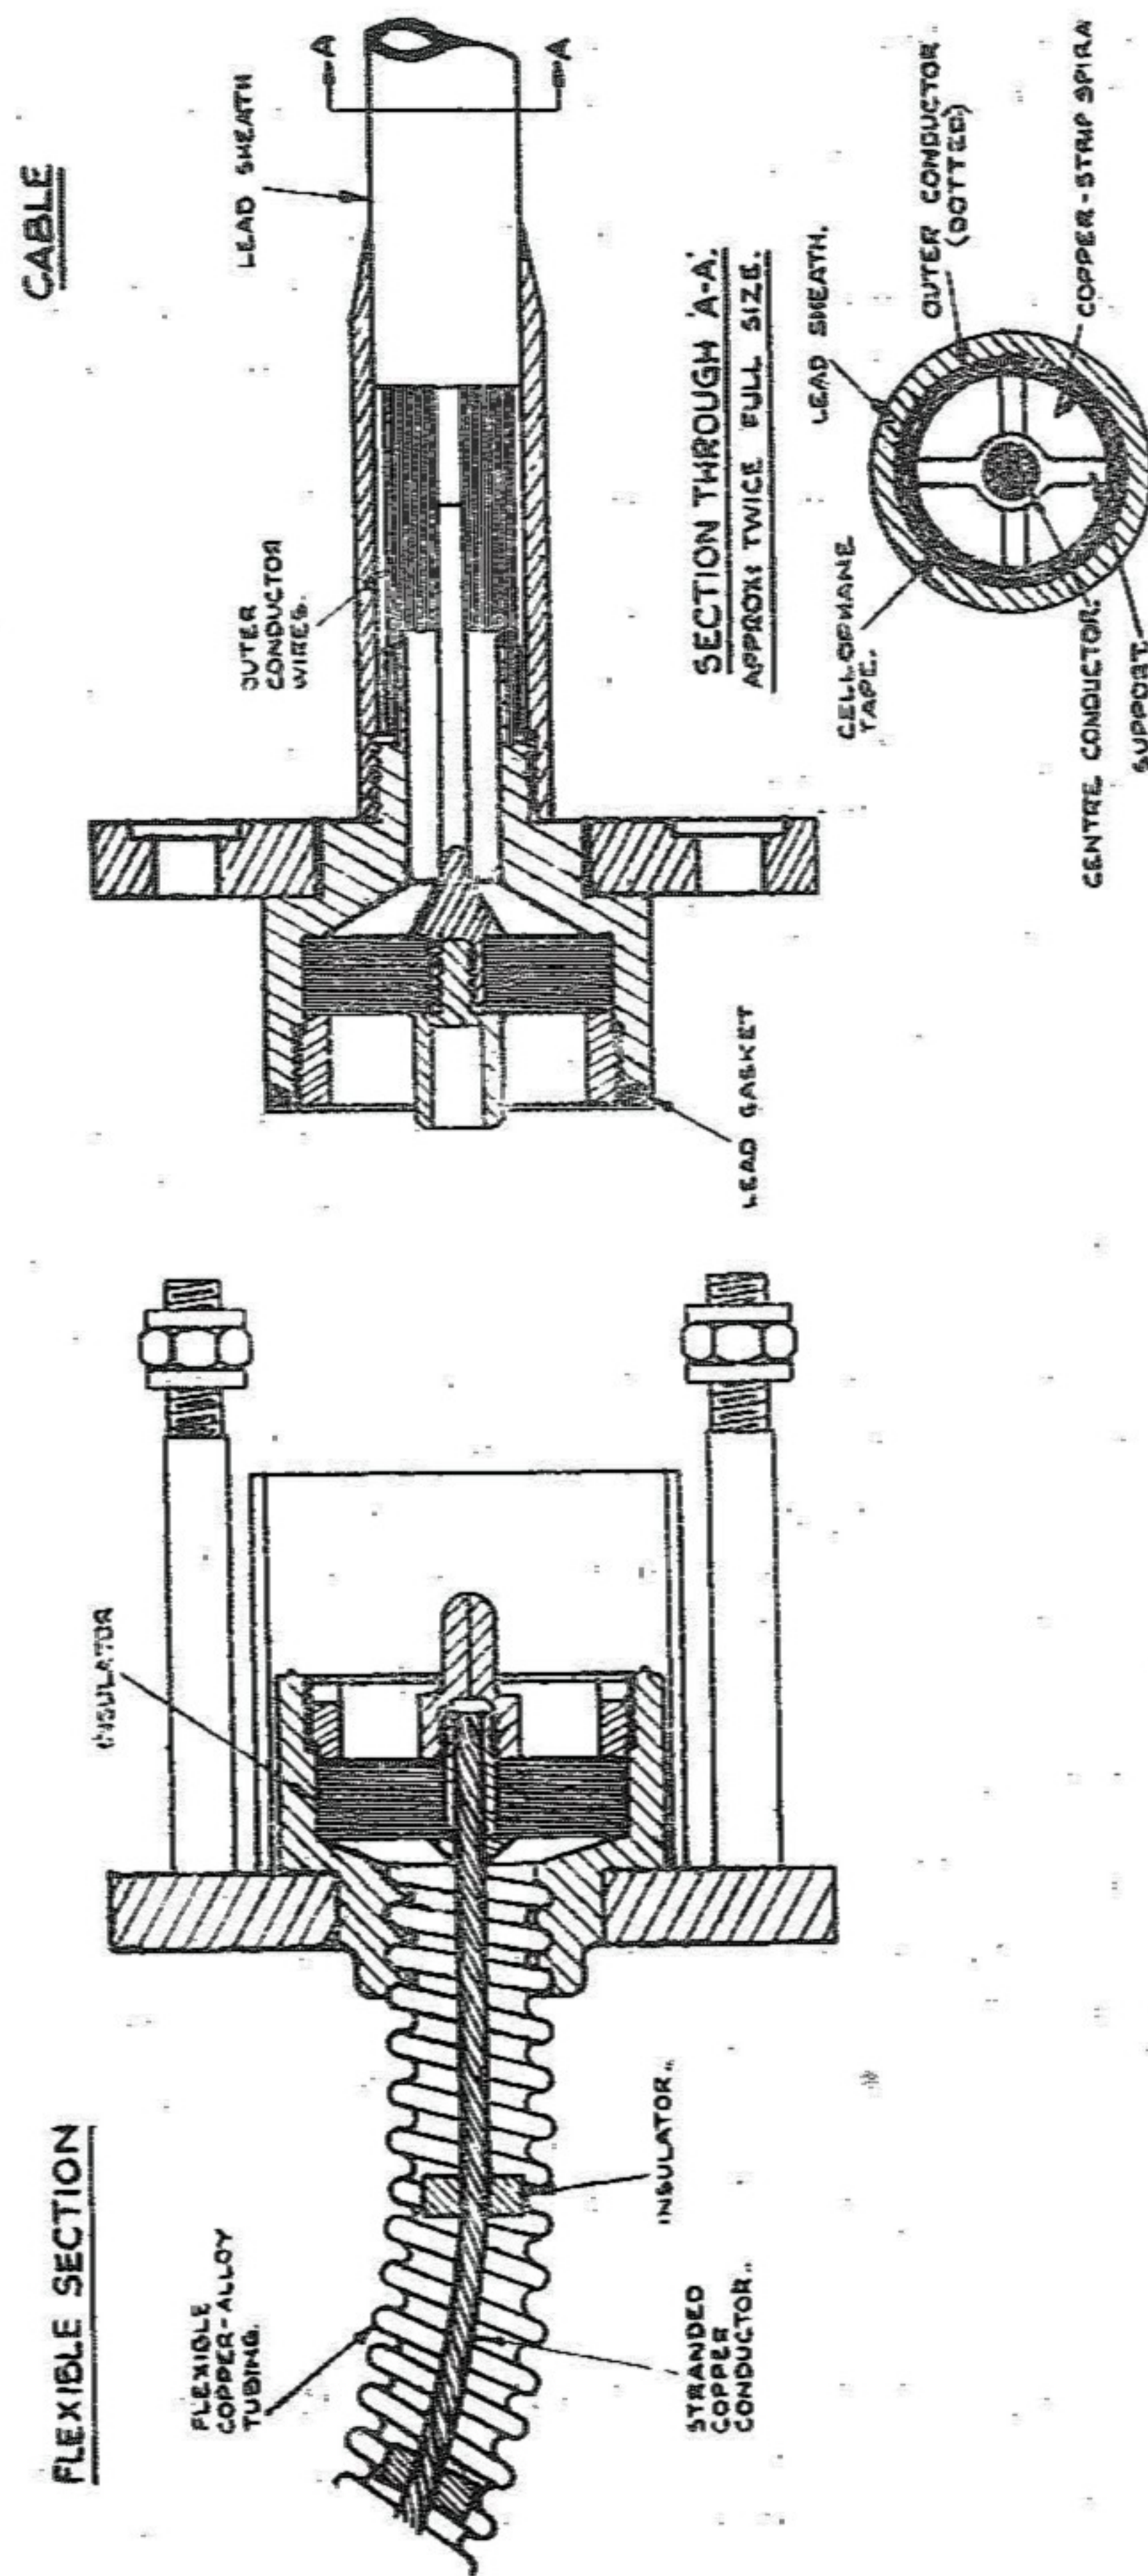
Details of plug and socket joint, cable, and flexible section.
